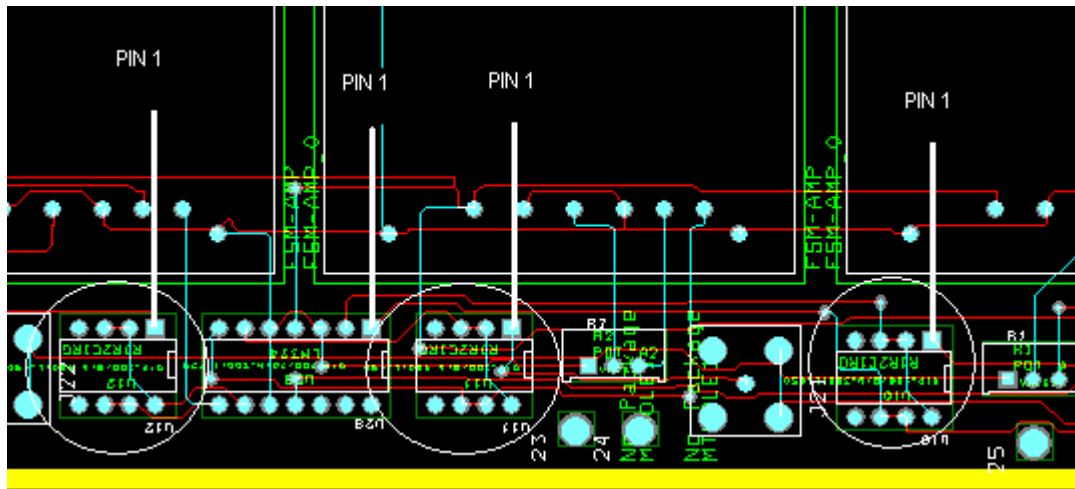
Zoom of PCB shows filter locations and orientation.
